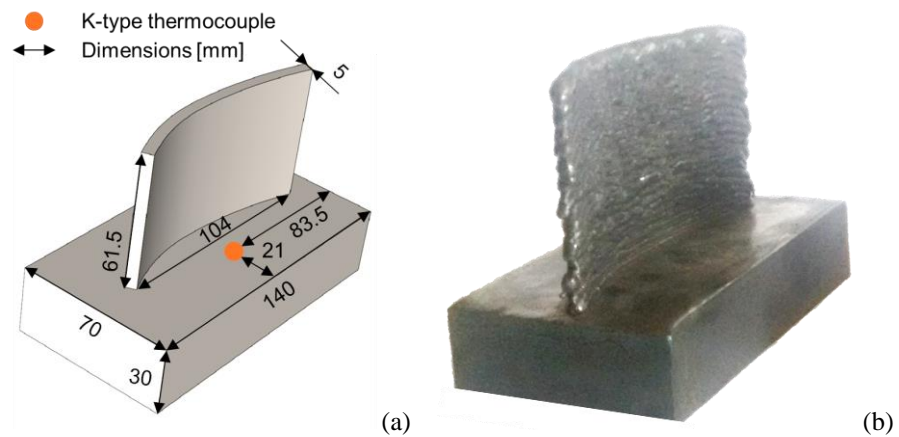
The airfoil used as test case: dimensions and thermocouple arrangement (a); actual manufactured part (b)
